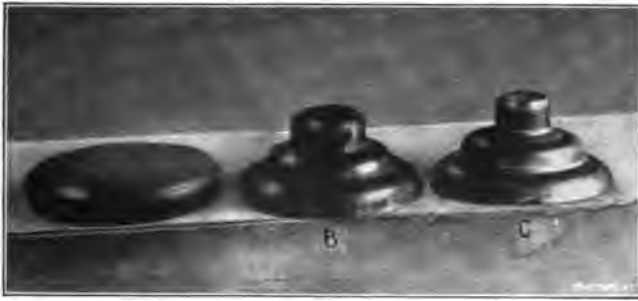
Successive Drawing Operations on a Steel Cup, which is drawn to Shape without annealing (Last Operation not shown)
